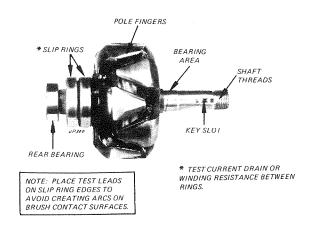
ROTOR INSPECTION & ELECTRICAL TESTS
